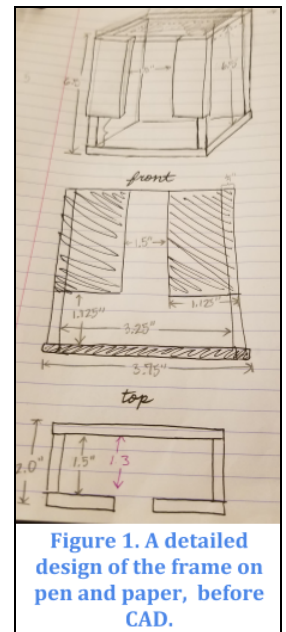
A detailed design of the frame on pen and paper, before CAD.
